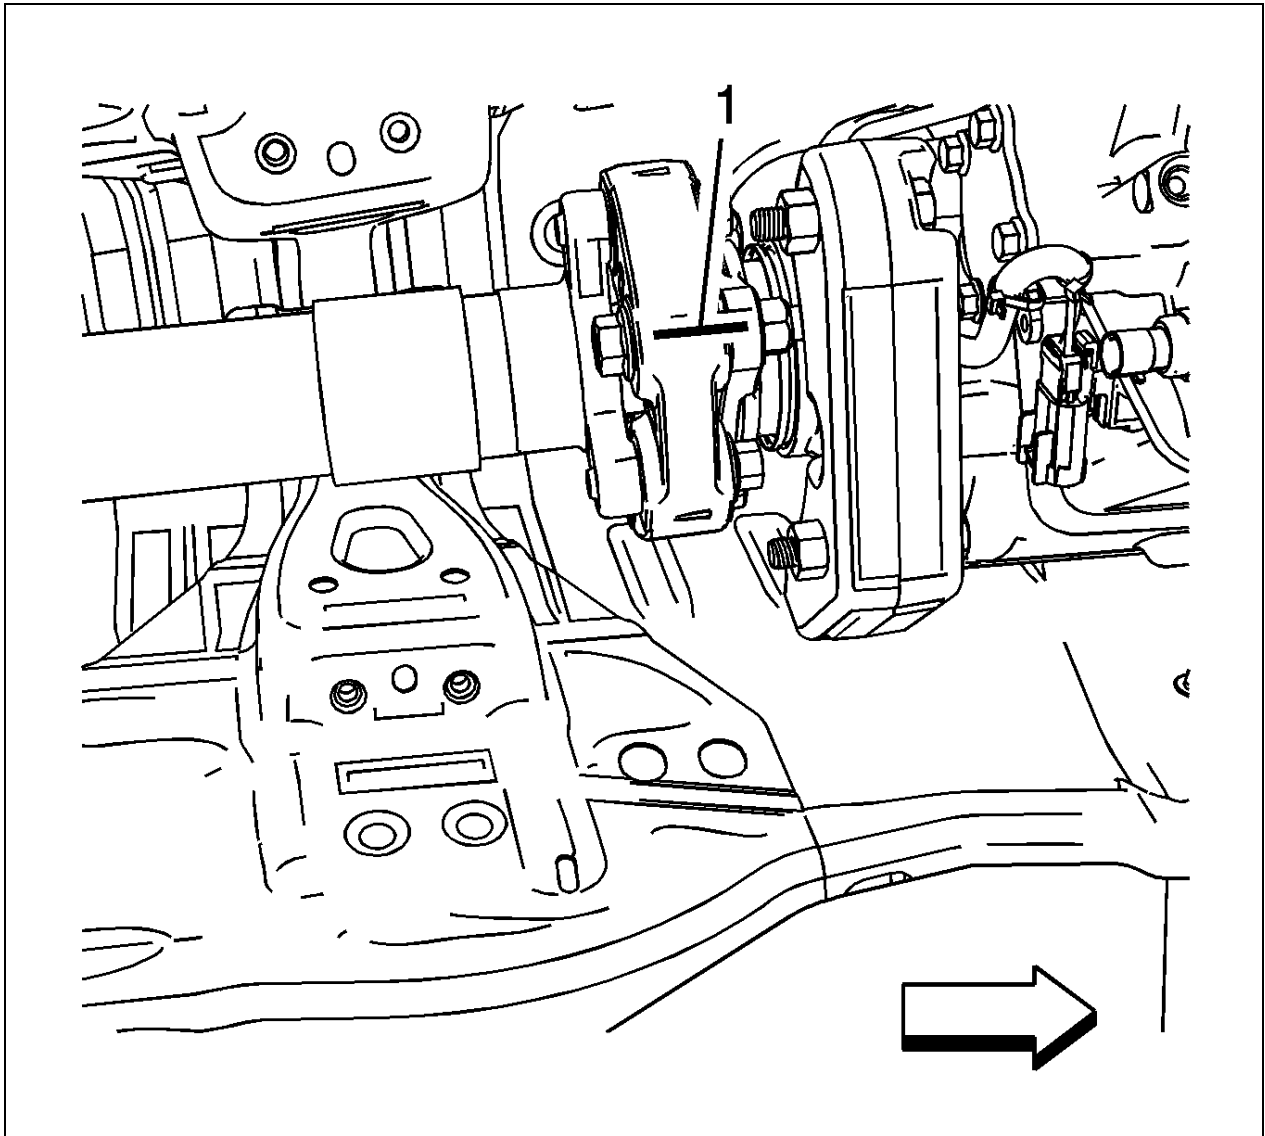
Rear Propeller Shaft Bolt &amp; Nuts
